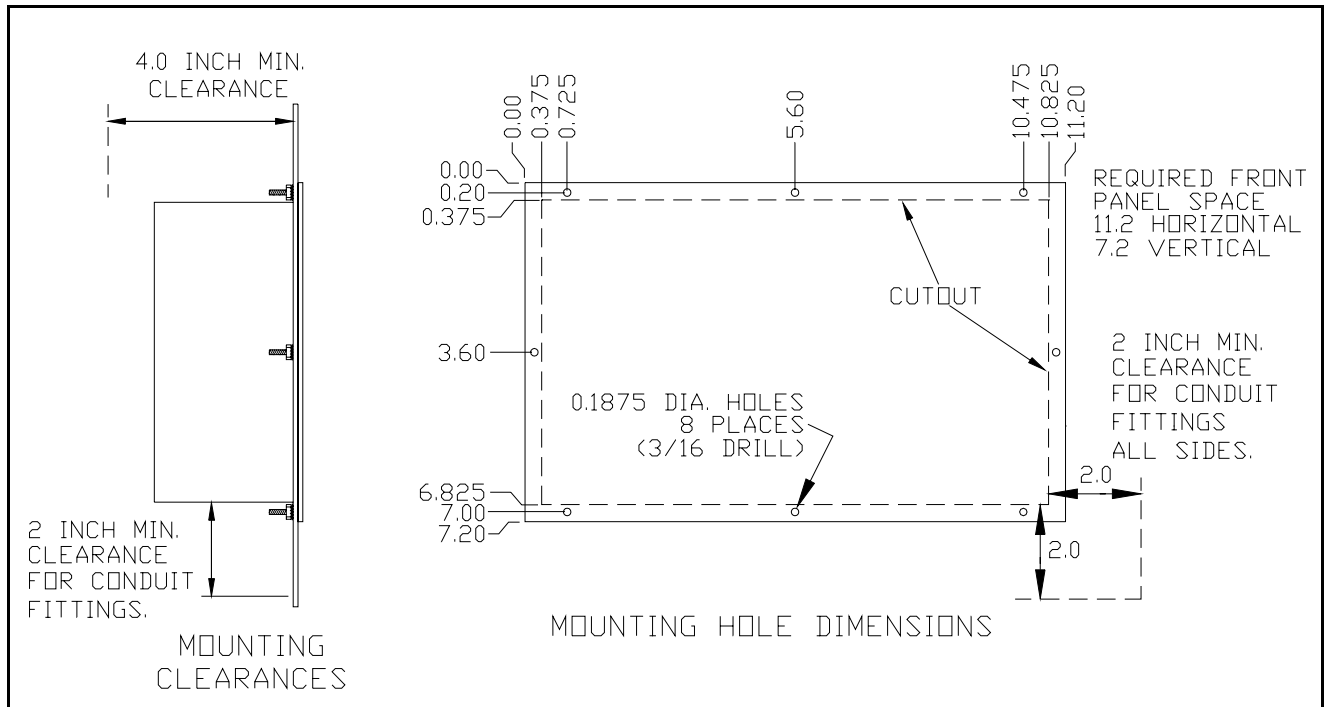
Dimensional Drawing for Panel Mount of MicroLink Enclosure
